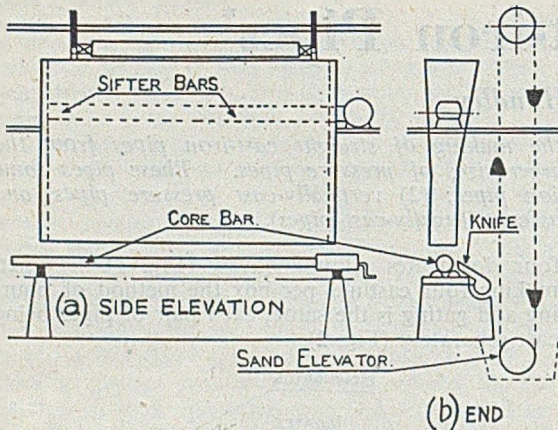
Core-making Machine for Soil and Ventilation Pipes using a Sand Elevator, Vertical Hopper and Strickle Knife.
